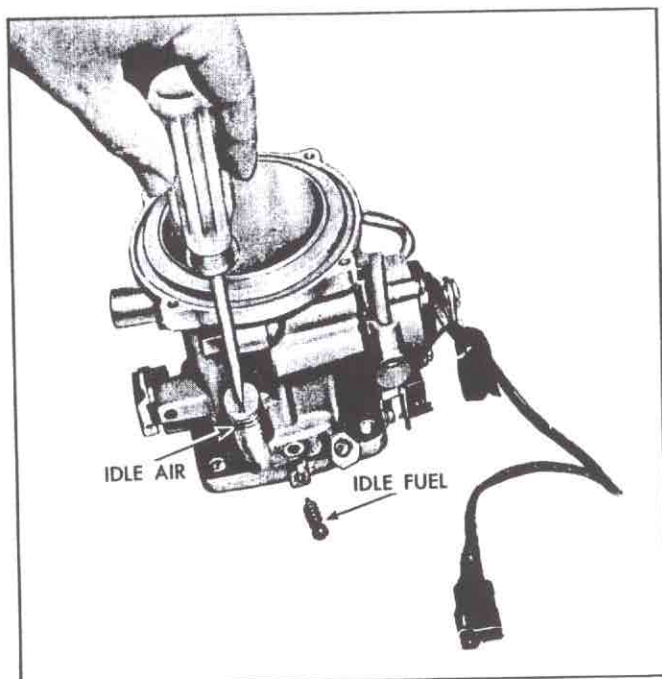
Installing Idle Fuel and Idle Air Adjusting Screws
